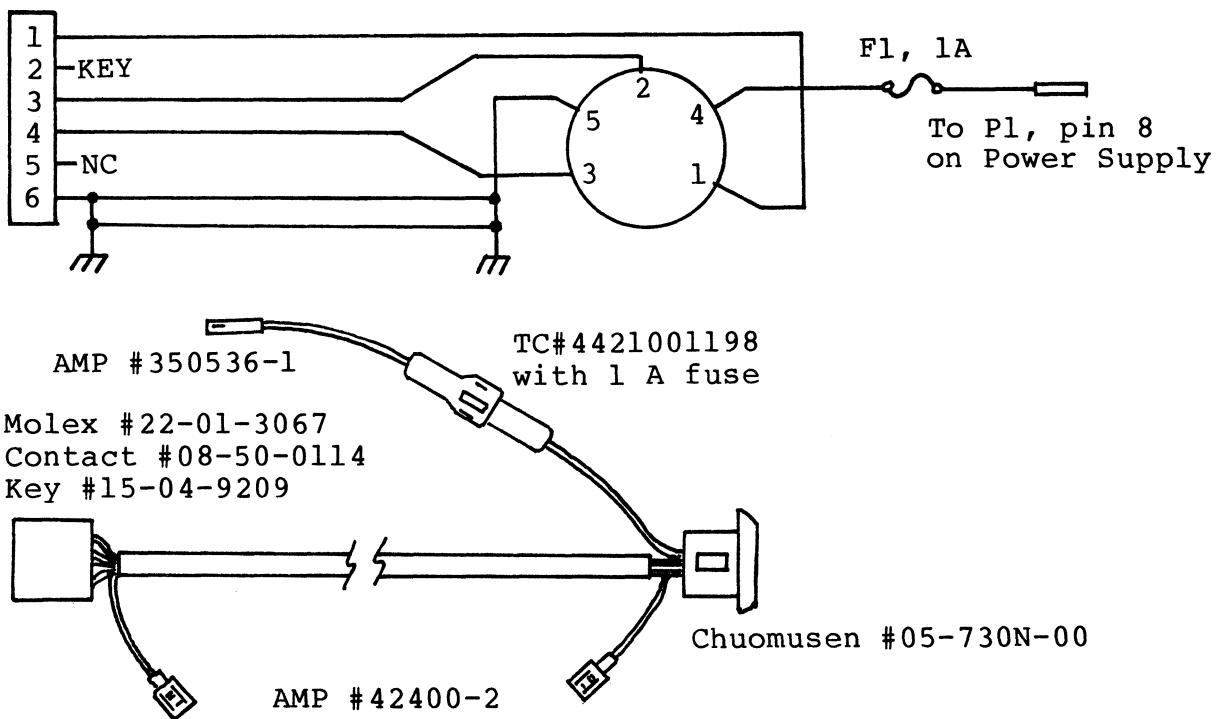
Video/Keyboard PCB to Keyboard Cable
